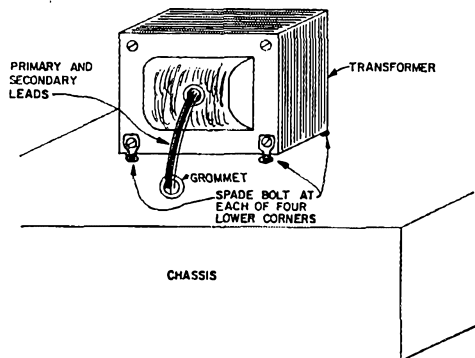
By mounting a transformer as shown, much chassis work is eliminated.
